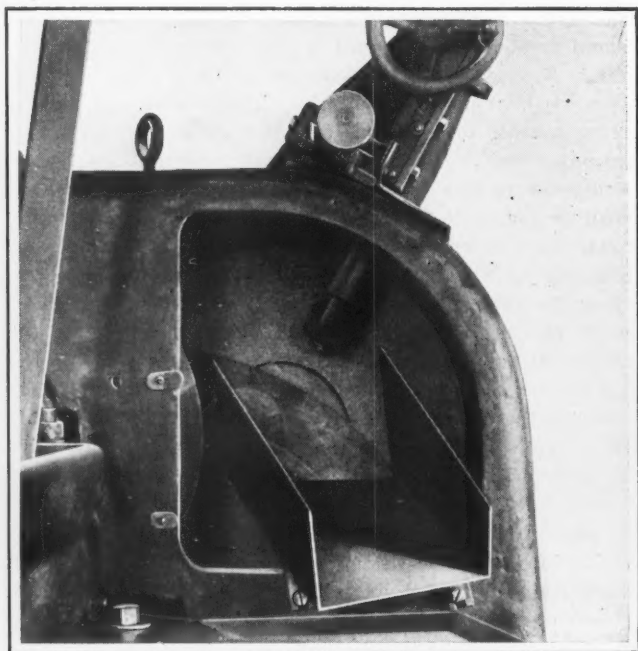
Close-up View of One of the Devices provided for truing the Grinding Disks
